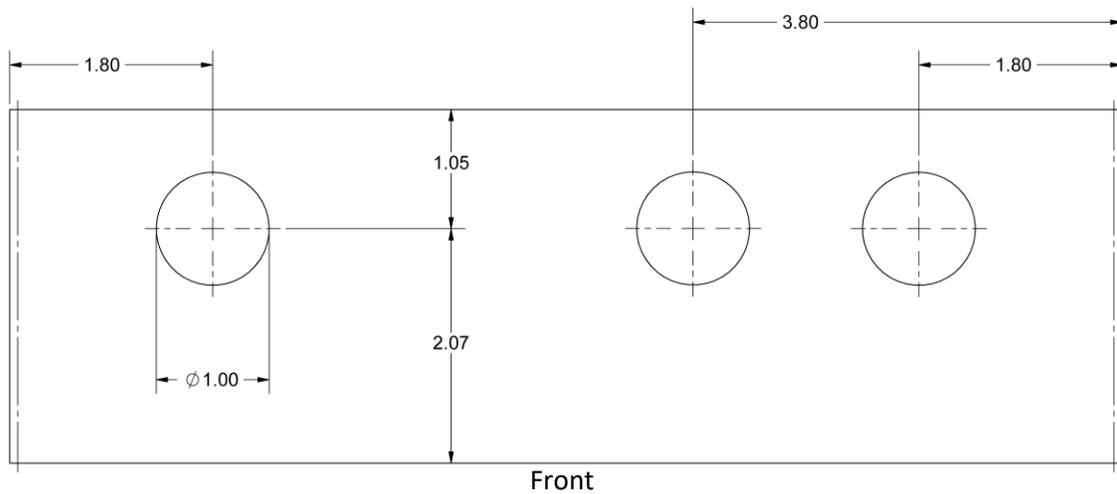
Surface Mount FLA Sleeve Drill Points (Top View)
